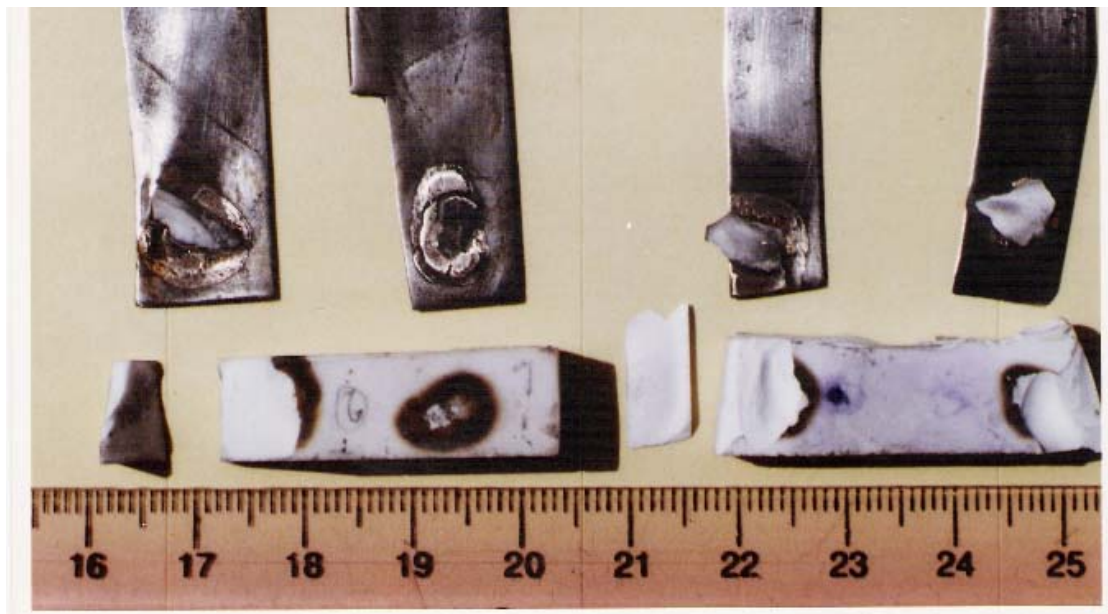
Showed fracture Modes of Joints Between Alumina to Kovar.
